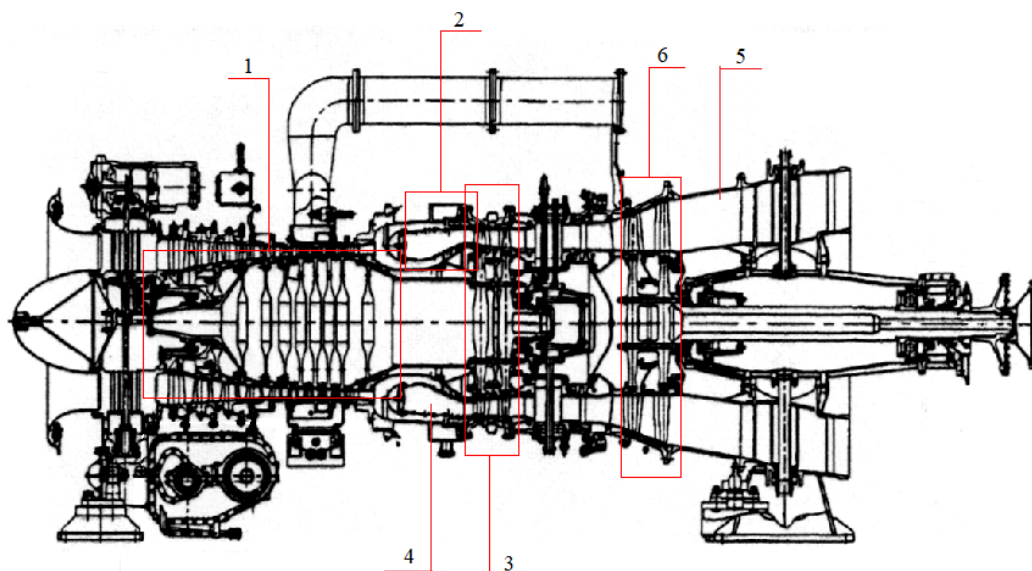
Gas generator of a marine GTE. 1 – compressor; 2 – combustion chamber; 3 – turbine compressor; 4 – flame tubes; 5 – nozzles; 6 – working blades.
